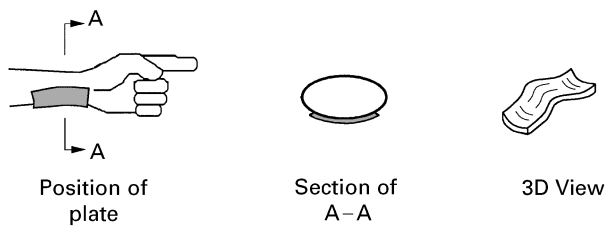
Fixation plate for broken hand joint. The manufacturing steps are: (1) Imprint of broken hand joint area in the needle-bed. (2) Fixing of the needles. (3) Stamp forming of fixation plate.
